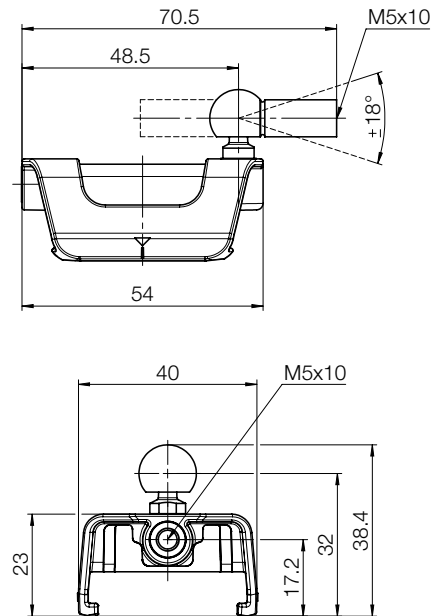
Installation dimensions of BAM TG-IR-037-B target
